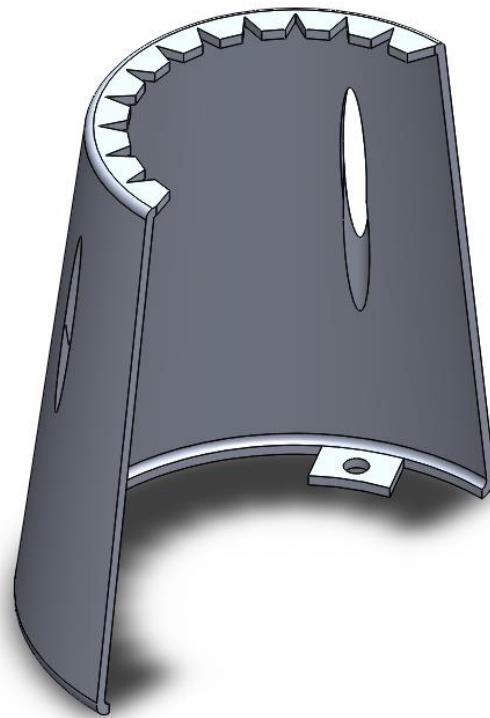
Cut Isometric View of Sheet Metal Tail Cone Alternative.
